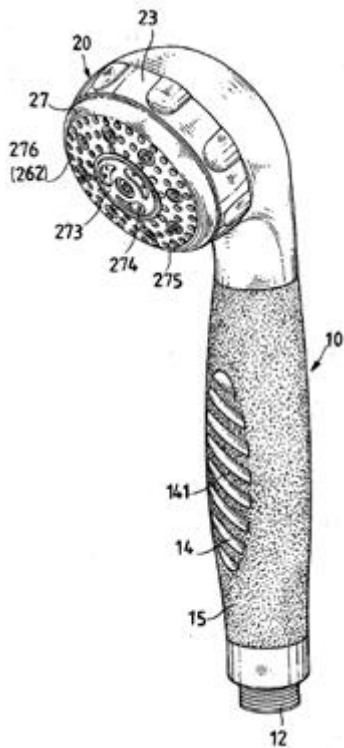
illustrates a shower head (10) provided with a ring controlling element (20) being part of the shower head housing.
